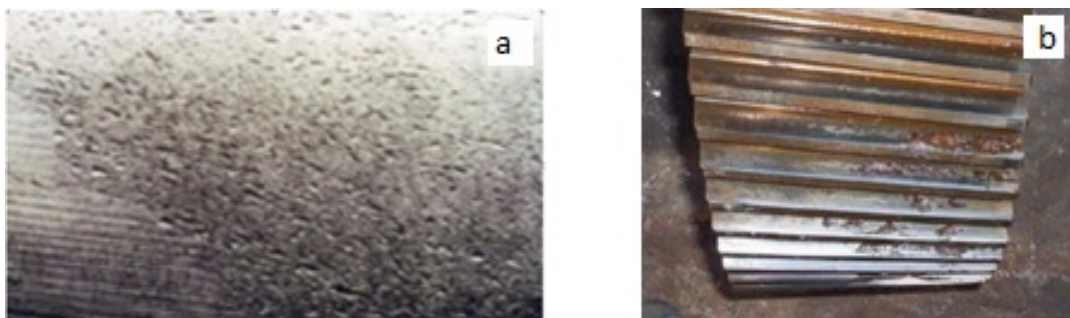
Gear tooth surface (a) pitting and (b) spall [7].
